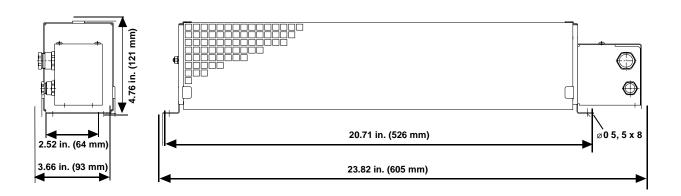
Mounting Dimensions for 460V External Shunt (P/N M.1302.7049)
